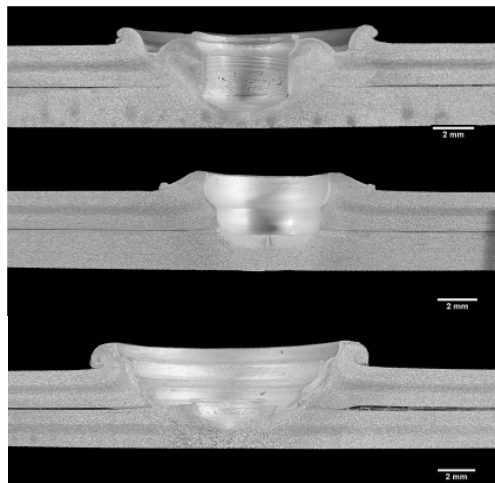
Structure splices for use [4]: a) tool A, b) tool B, c) tool C
